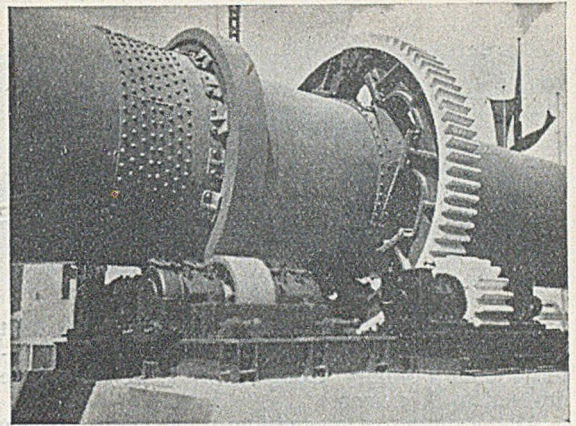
Girth Gear and Pinion in S.-g. Iron, shown assembled as the Drive for a Rotary Cement Mill; made by Fonderia Tagliabue, Italy.
